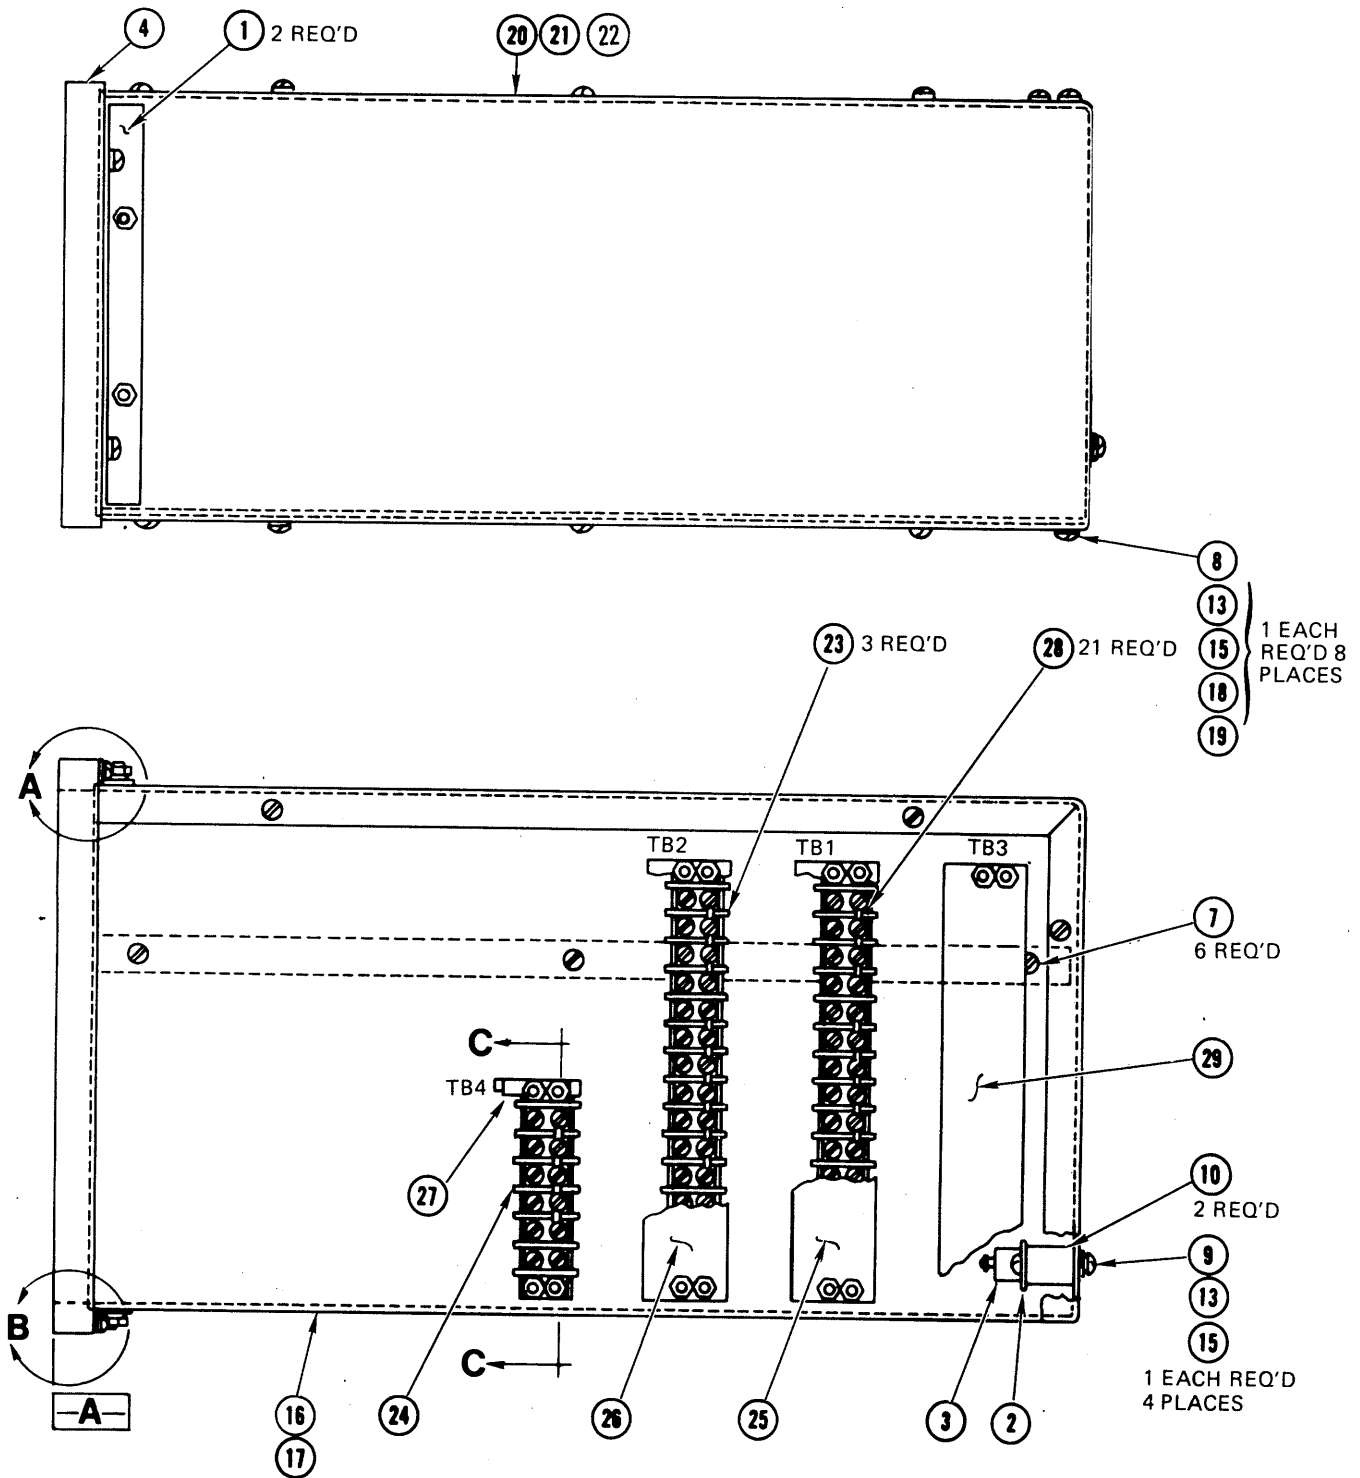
Card Rack Case Assembly (Sheet 1 of 2)
